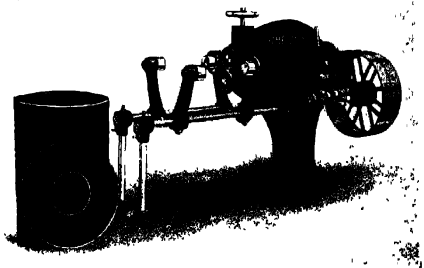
Drum-end slitter which cuts out the ends of disused drums.
